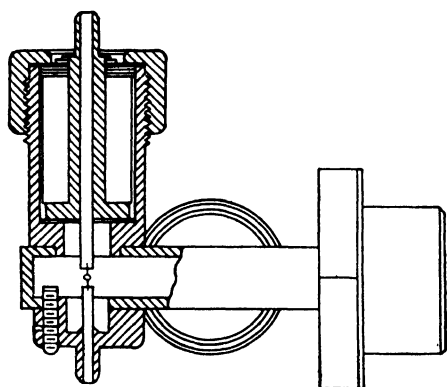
Drawing of a 1-cm-band thermistor mount. (Improvement on design shown in Fig. 3-42.)
